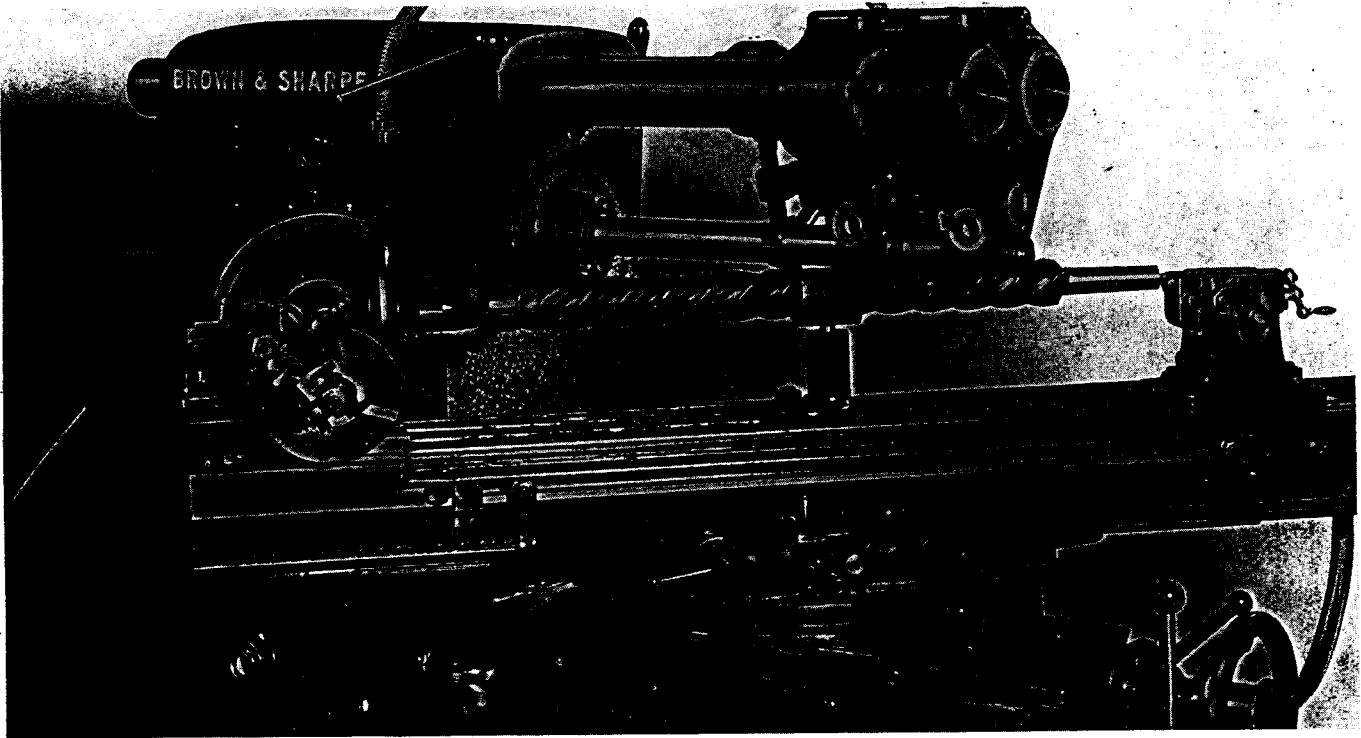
(above). Taking a finishing cut on a 4-tooth arbor-type helical milling cutter. A Universal machine is used; and the arrangement of headstock gearing (here enclosed by Change Gear Guard) and angle at which to set swivel table are taken from a chart furnished. On completion of a cut, the work is returned at fast travel to starting position and is plain-indexed for the next cut.
